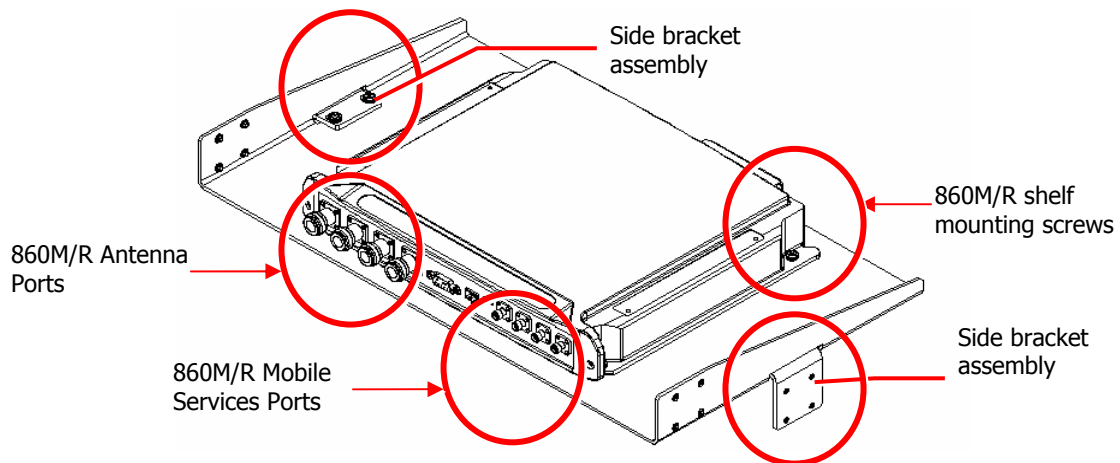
860M/R MA-2000 Stacking Bracket Assembly
